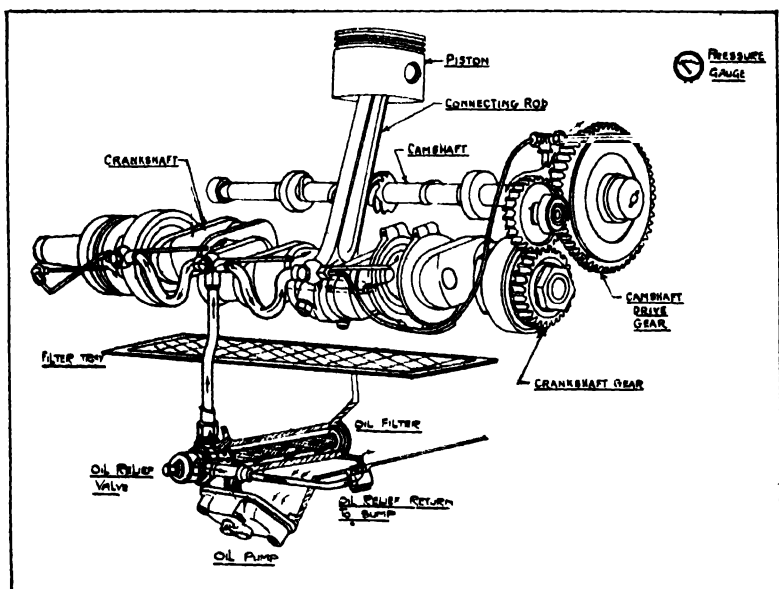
Oiling System of the A.D.C Mark II Cirrus Engine.
